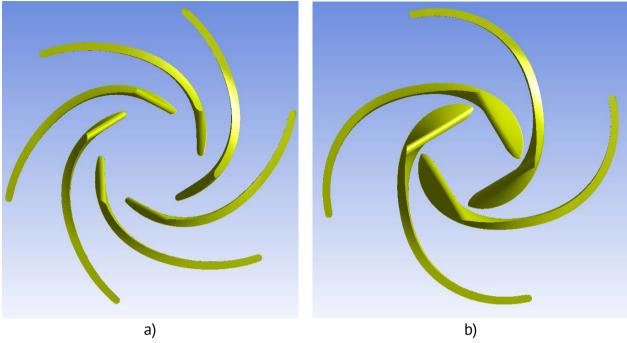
Geometric model of the impellers: a) the original impeller; b) the impeller with optimized blades
